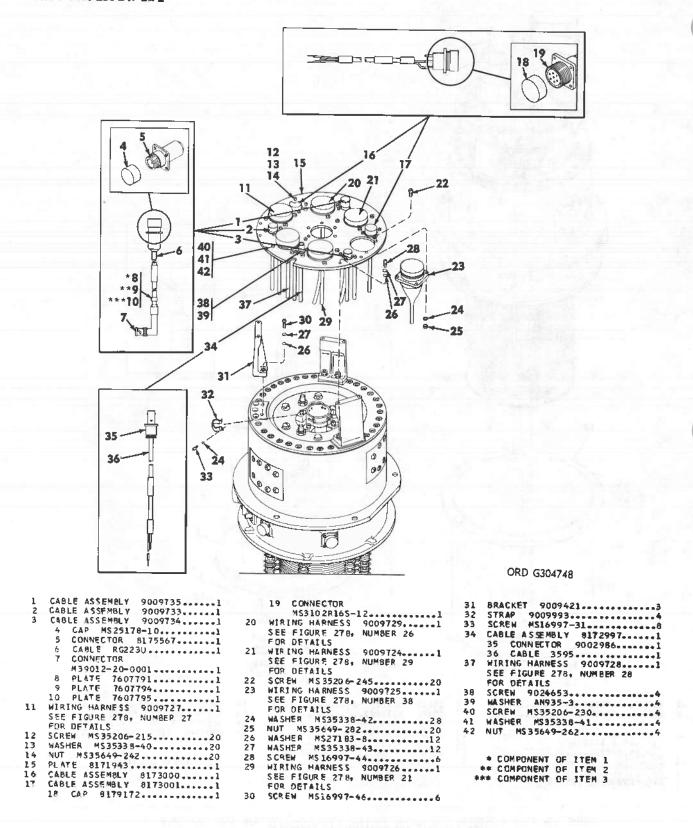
RING ASSEMBLY, ELECTRICAL CONTACT /9009416/-PARTIAL EXPLODED VIEW
